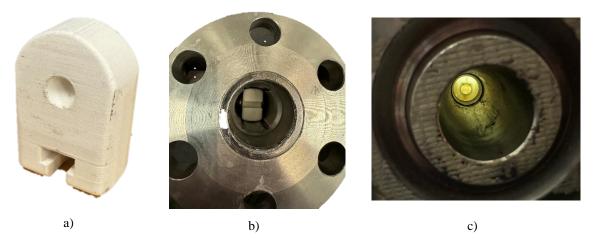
Valve prototype valve fitting a) Wedge prototype, b) Top view, c) Side view with illumination
